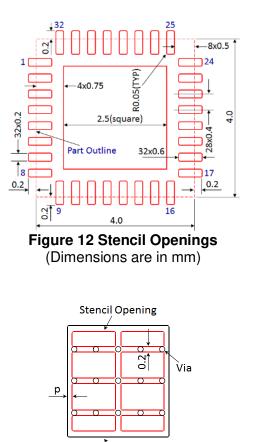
Stencil Openings Shall not Cover Via Areas If Possible (Dimensions are in mm)
